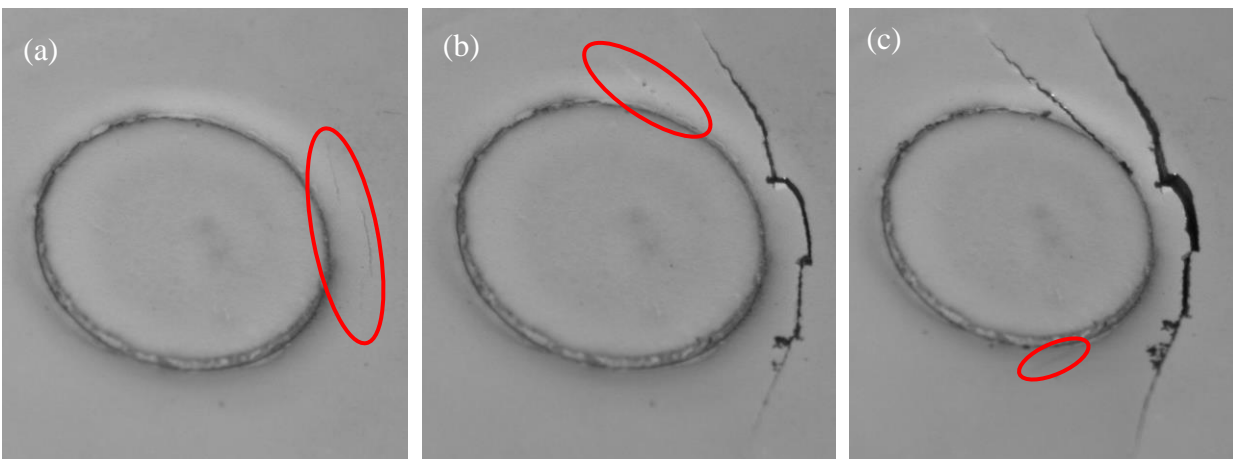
Pierced sheet details from $N_{final} = 326,549$ 90° specimen in Figure 56 with first visible crack at $N = 111,000$ (a), propagated first crack and visible second crack at $N = 300,000$ (b), and frame before separation (c)
